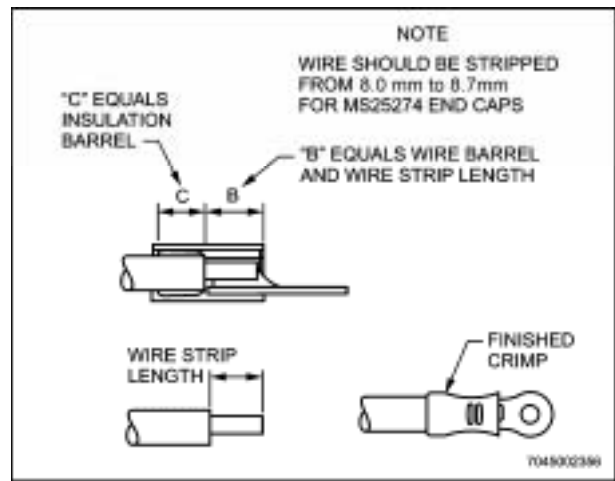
Proper Insertion of Stripped Wire in Insulated Terminal Lug for Crimping
